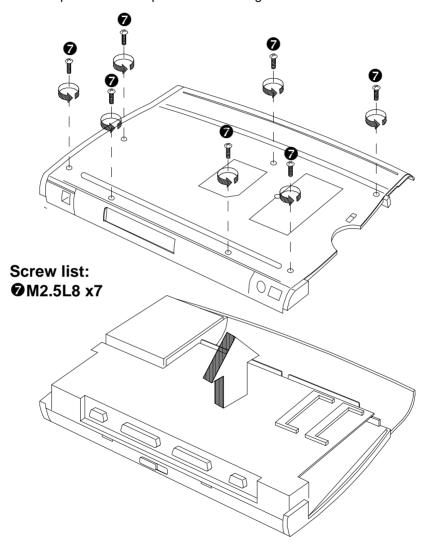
Removing the Hard Disk Drive Bay Cover
